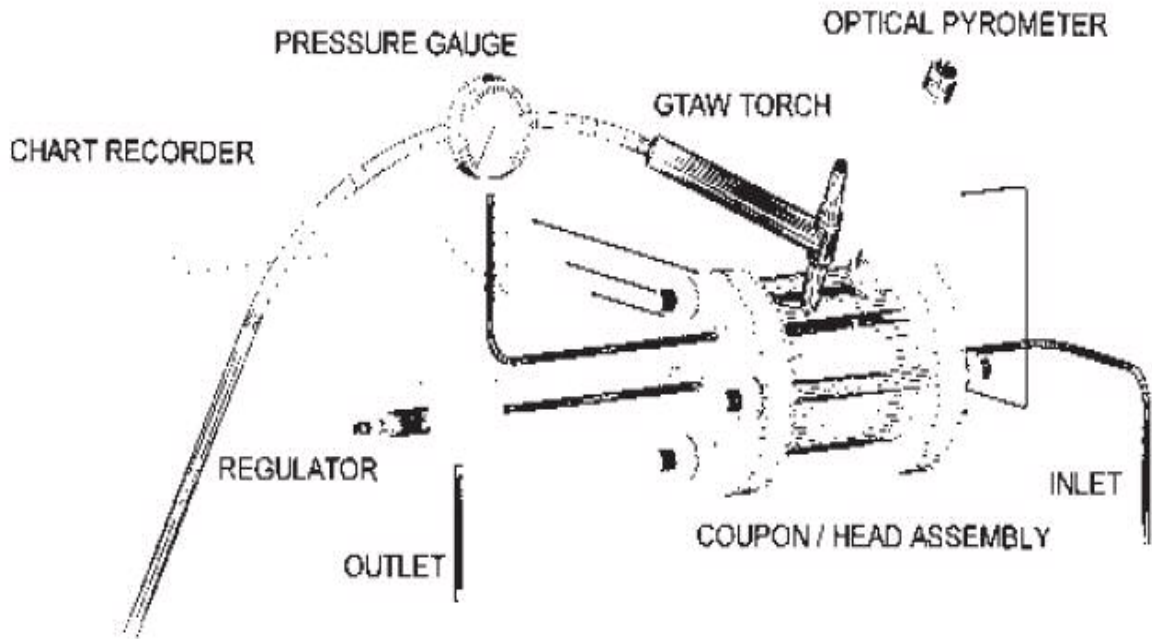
Experimental pressurized pipe test assembly showing position of the chart recorder, pressure gauge, GTAW torch, optical pyrometer, inlet, coupon/head assembly, outlet, and regulator [9]
